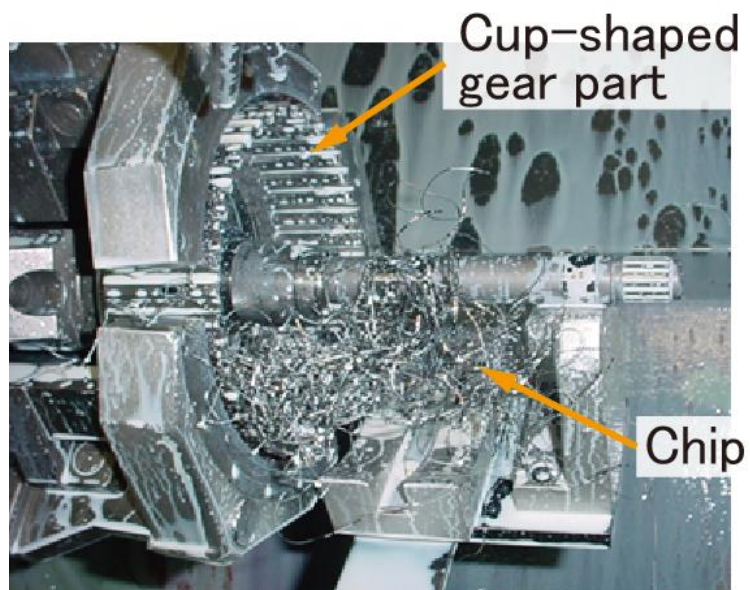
Chip jam in finishing process of cup-shaped gear part for automobile transmission
